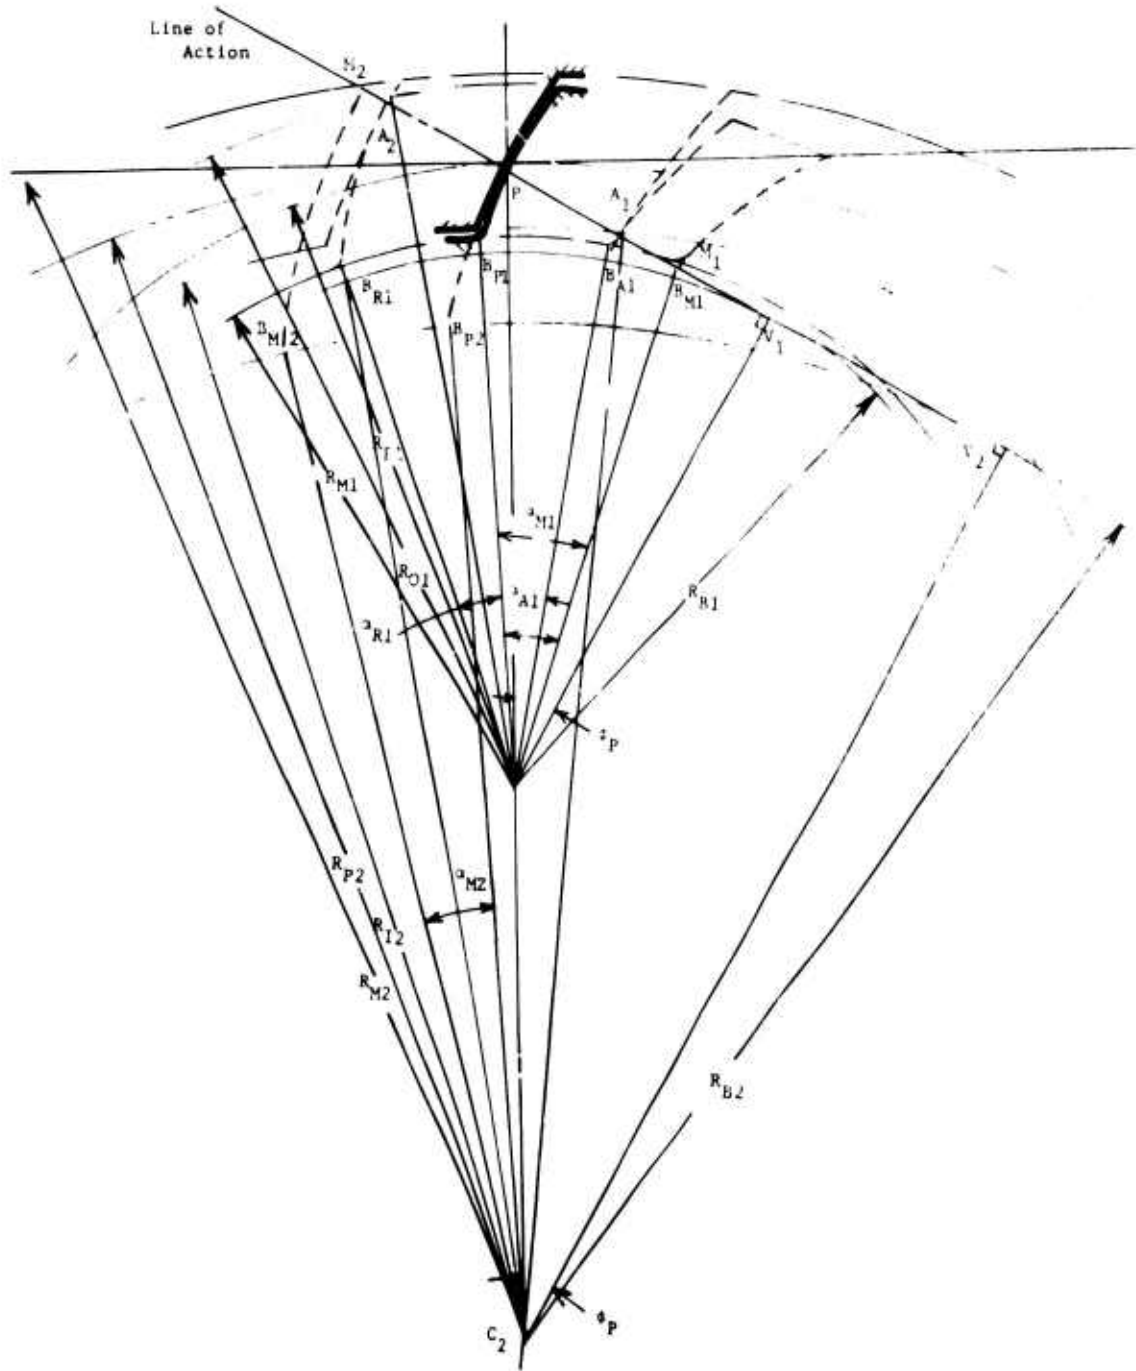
External Gear Tooth Driving Internal Gear Tooth.
